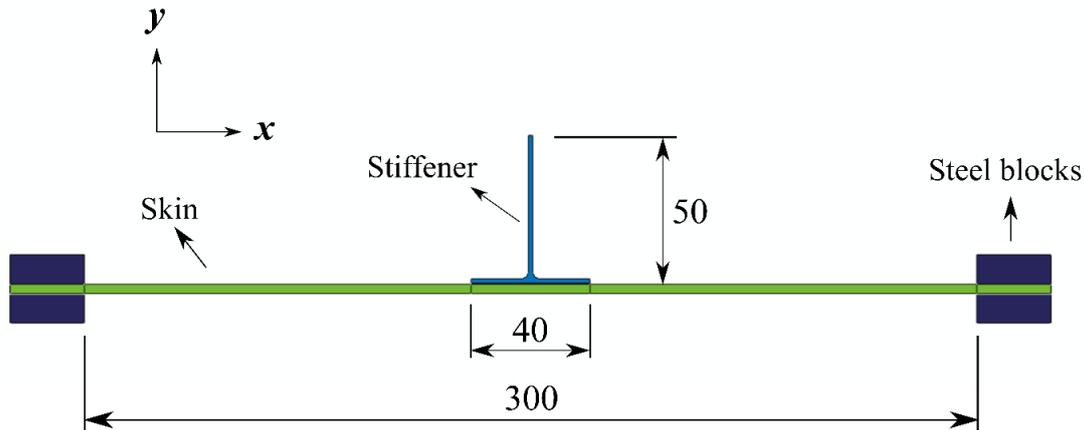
Dimensions of the skin-to-stiffener geometry used in the present work.
